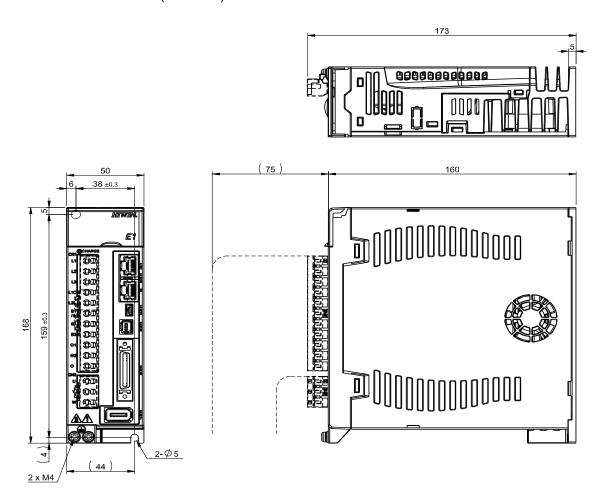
The dimensions of 4 kW servo drive (Standard)
